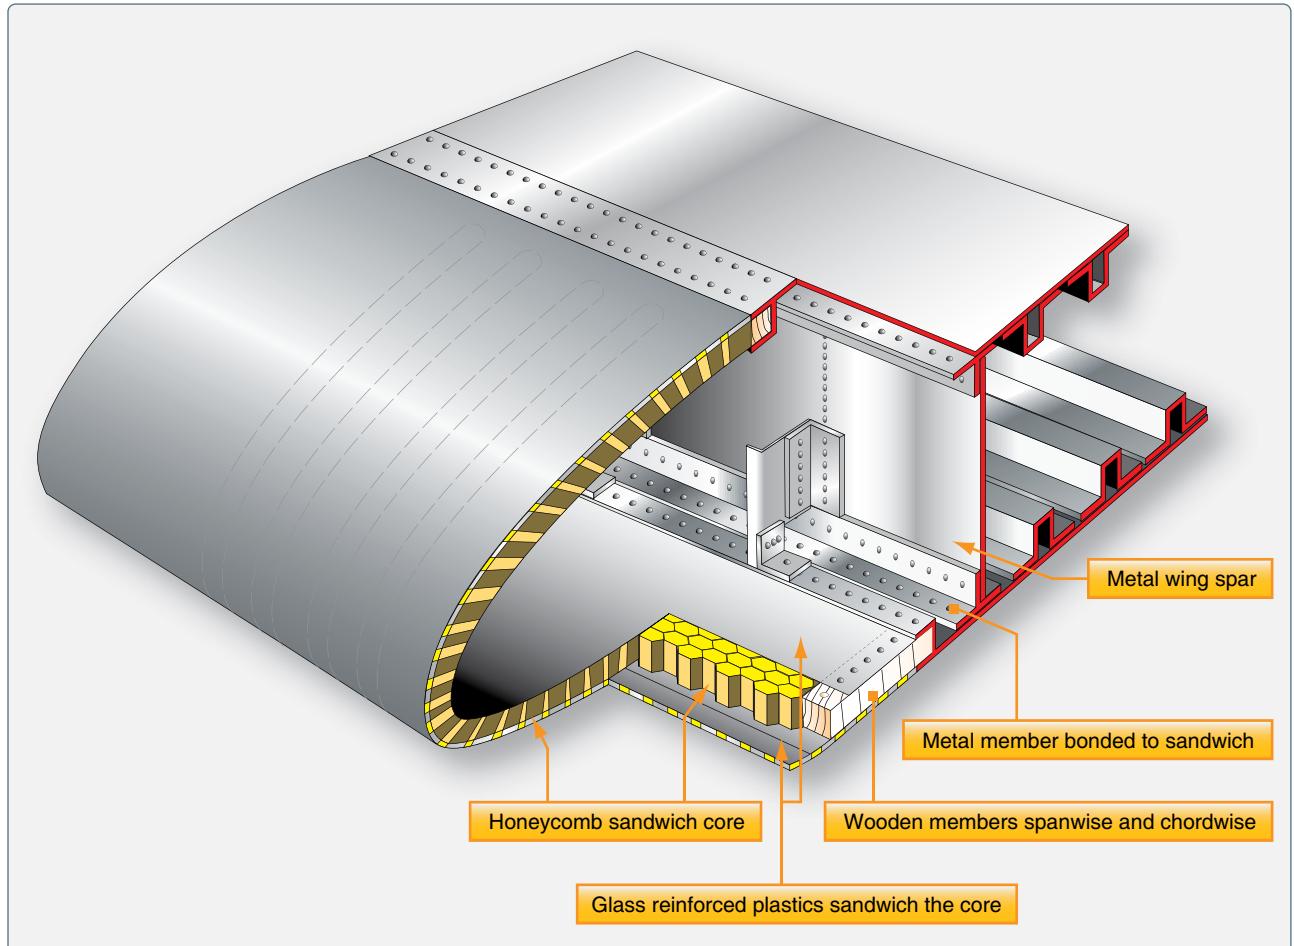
A wing leading edge formed from honeycomb material bonded to the aluminum spar structure.
